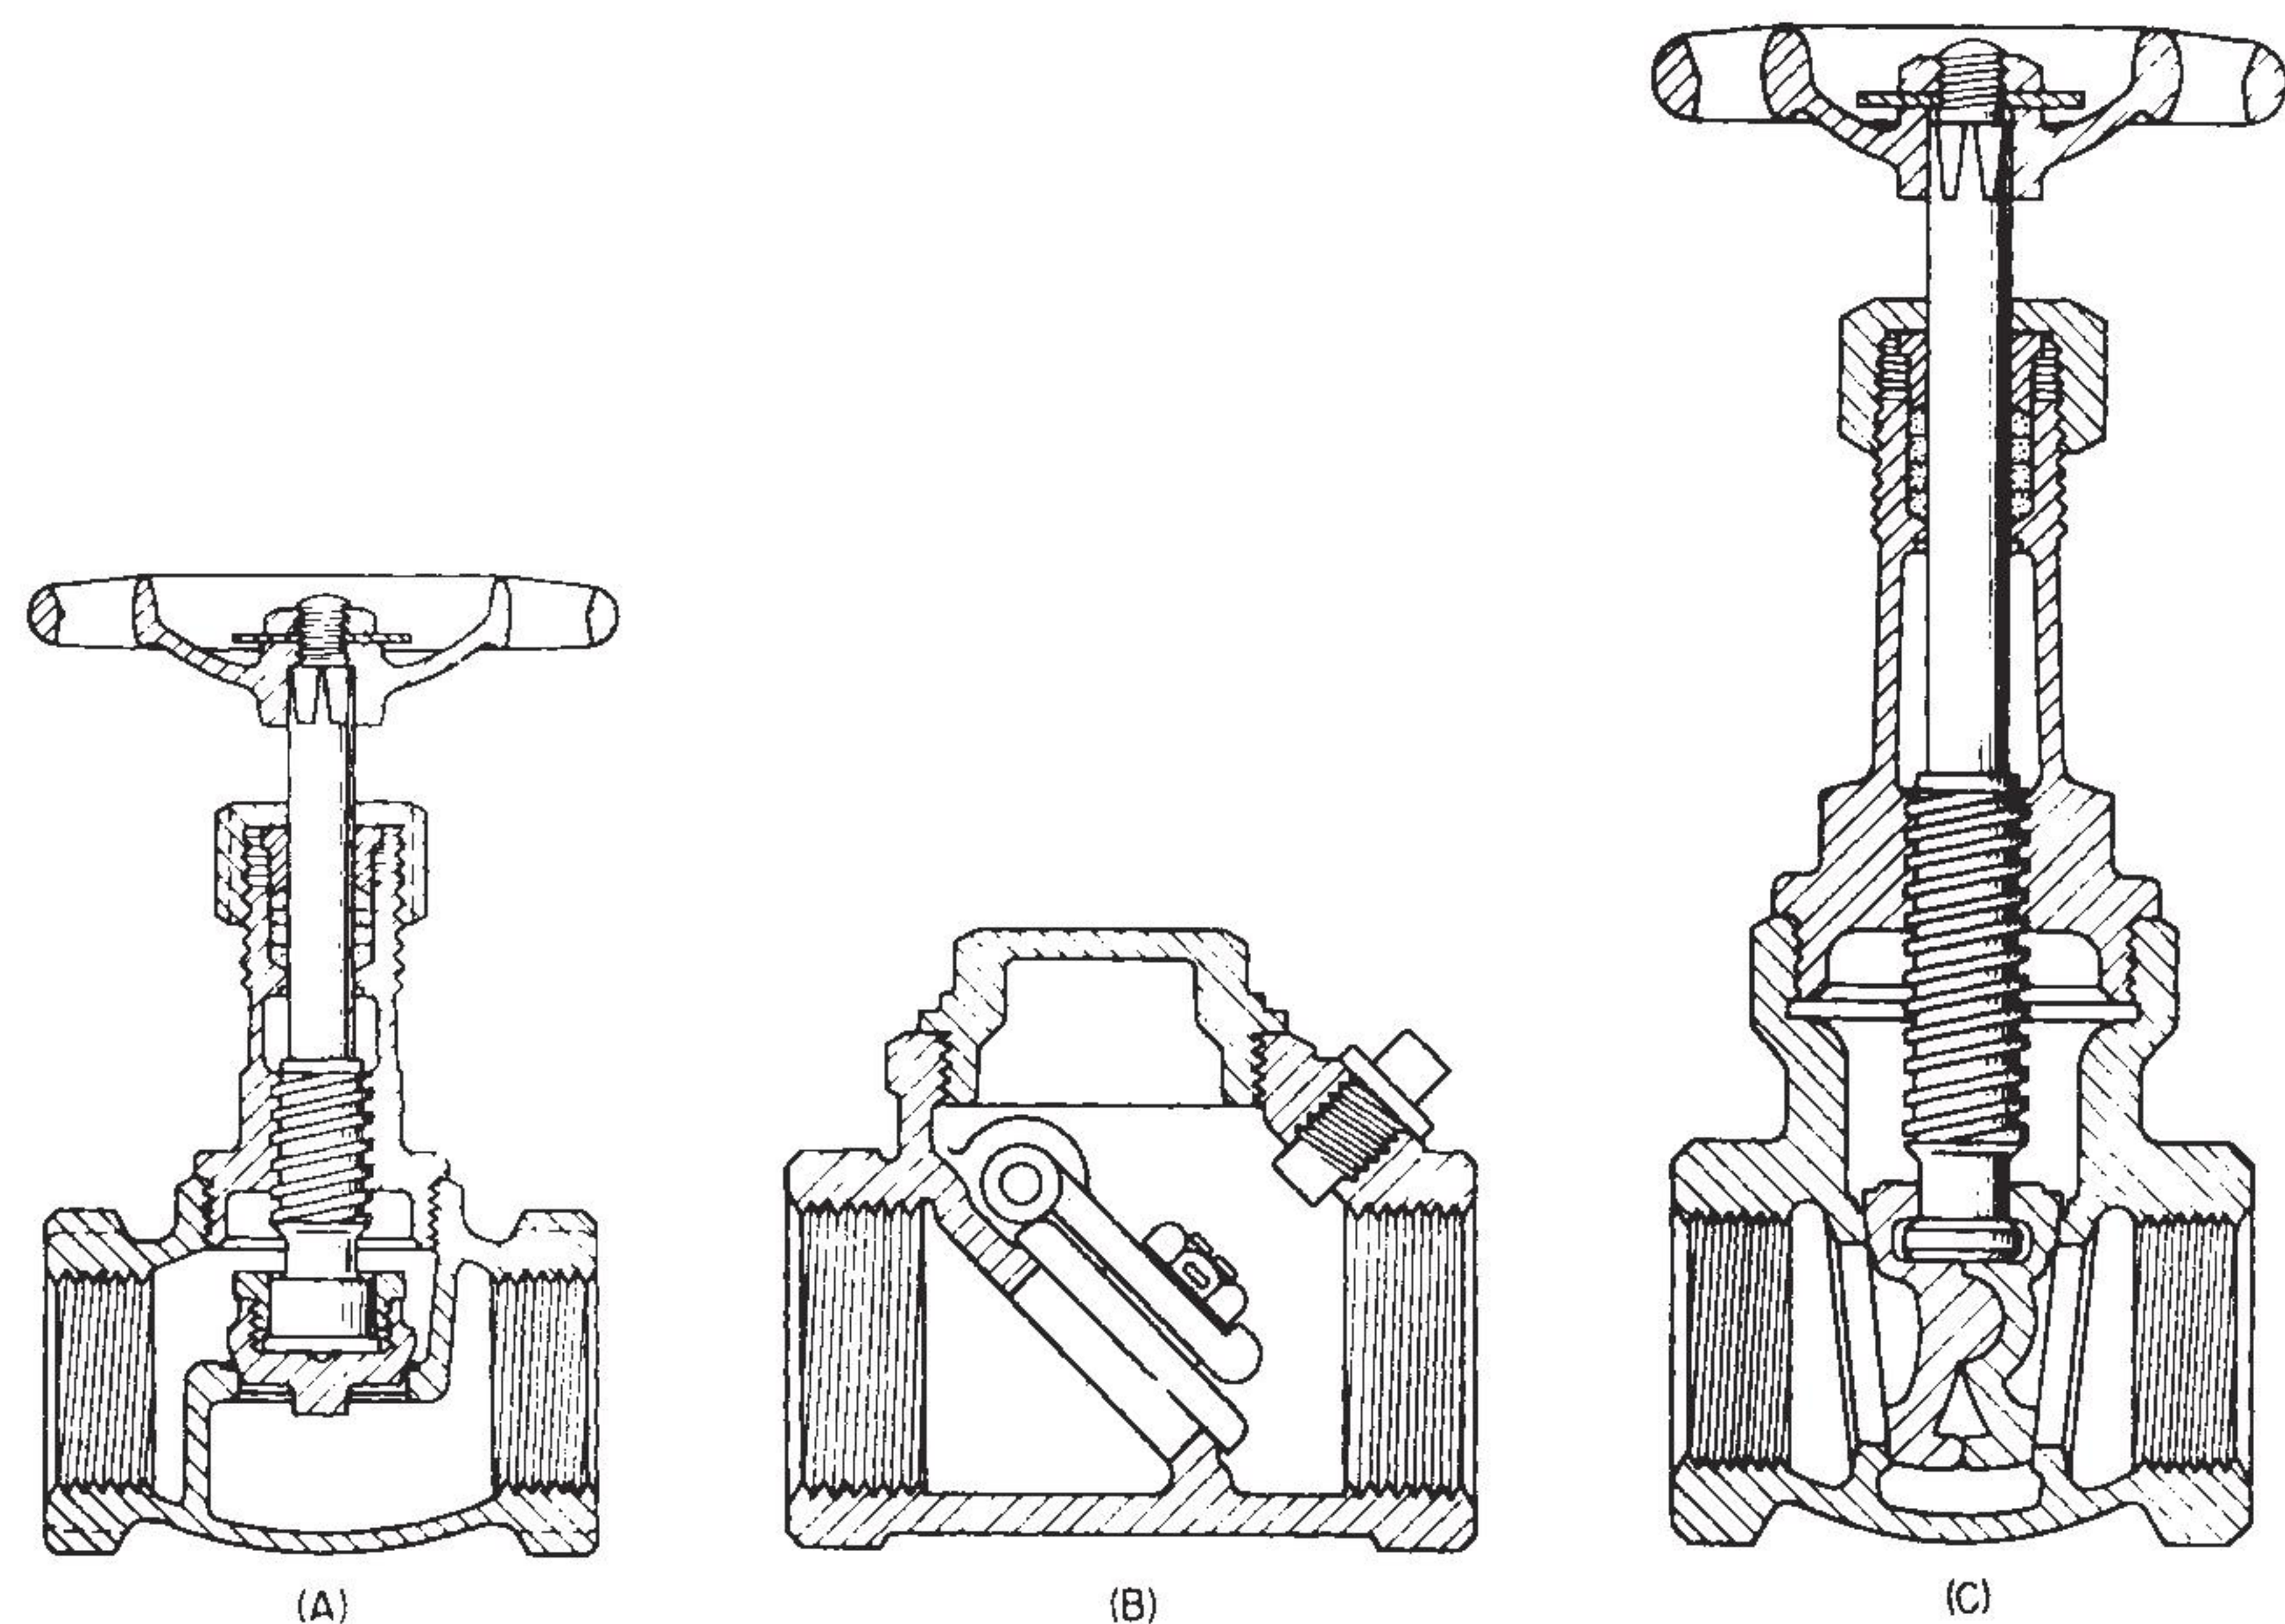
Three basic designs. A. Globe. B. Check C. Gate.
